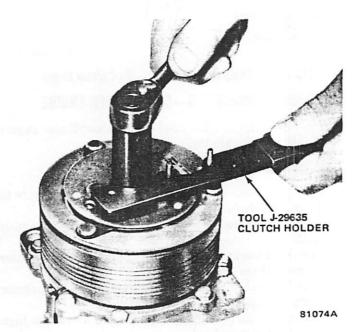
E-20 Removing Front Clutch Plate Hex Nut
